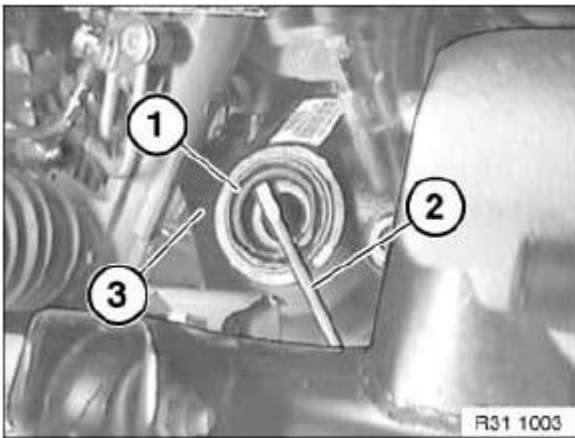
Identifying Lever Shaft Seal And Screwdriver
